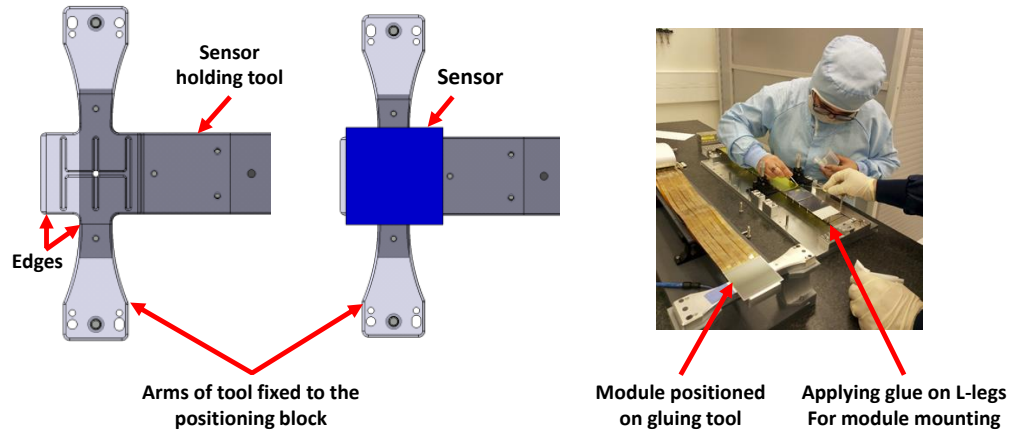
(Left) CAD drawing of the module holding tool where positioning of sensors (followed by micro-cables and FEBs) is defined by the edges of the tool. (Right) Image illustrating the two key steps: applying glue to the top L-leg surface and transferring the module from the holding tool to the ladder for final gluing.
